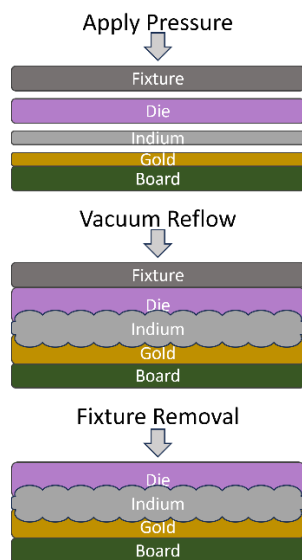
Side profile illustration of the eutectic die bonding process, showing sequential steps The process enables uniform bonding of the die to the gold-coated substrate using indium solder.
